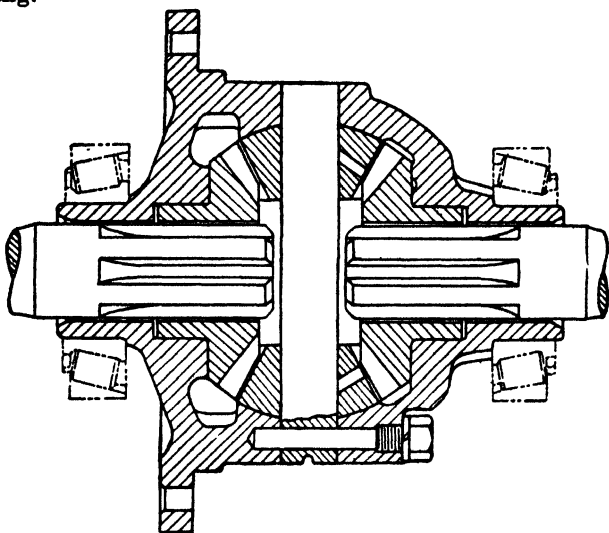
SINGLE-PIECE-HOUSING DIFFERENTIAL.
